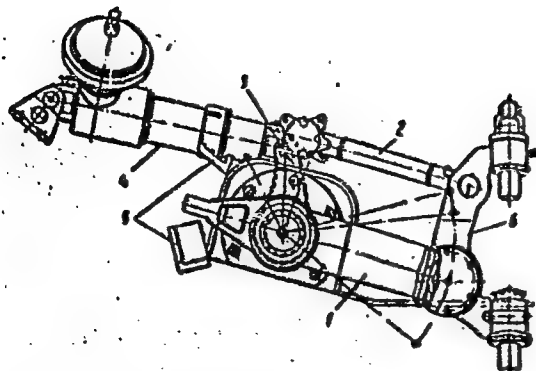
Front end automobile suspension (side view). 1 - balance rod; 2 - reaction bar (both in the longitudinal plane); 3 - crank; 4 - hydrospring; 5 - limiters; 6 - wheel-holding bearing.
